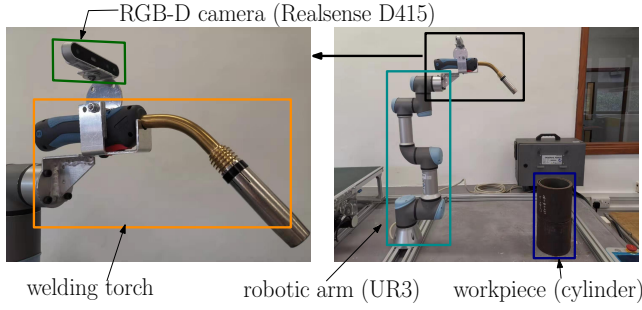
(on left) End-effector of the proposed welding robot system is composed of an RGB-D camera and a welding torch. The camera is situated above the welding torch. (on right) Experimental welding platform.
